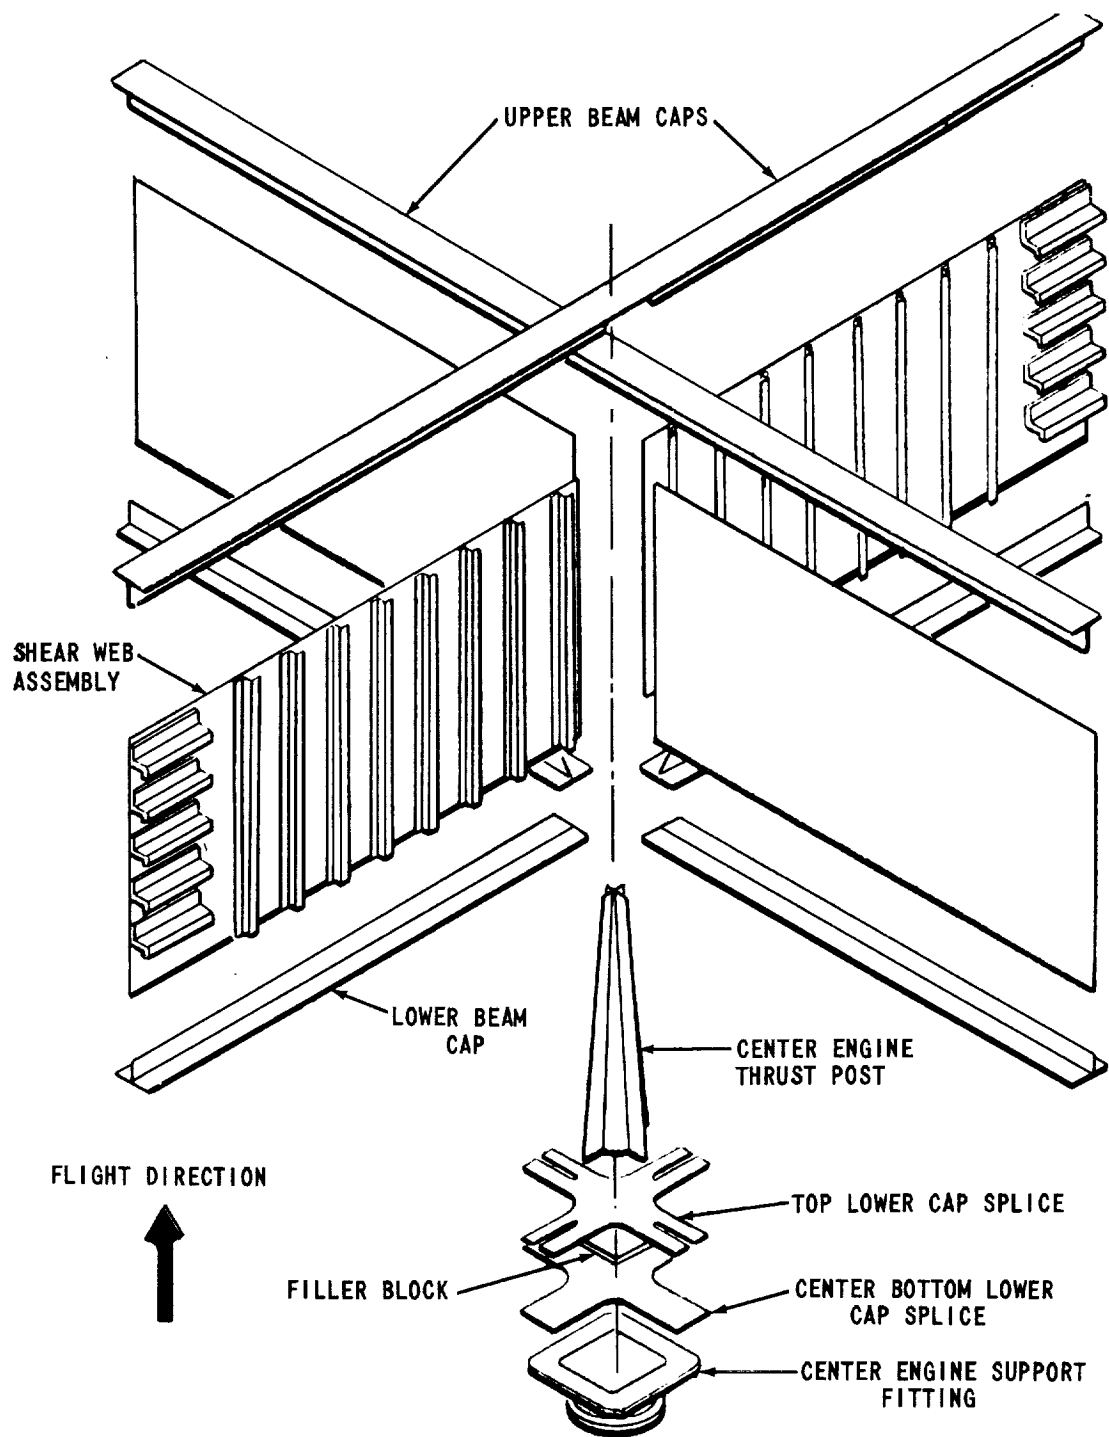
DETAIL B CENTER ENGINE SUPPORT ASSEMBLY - EXPLODED VIEW
